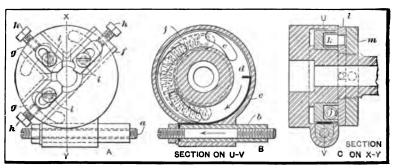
Details of Taper Turning Tool shown in Fig. 19
